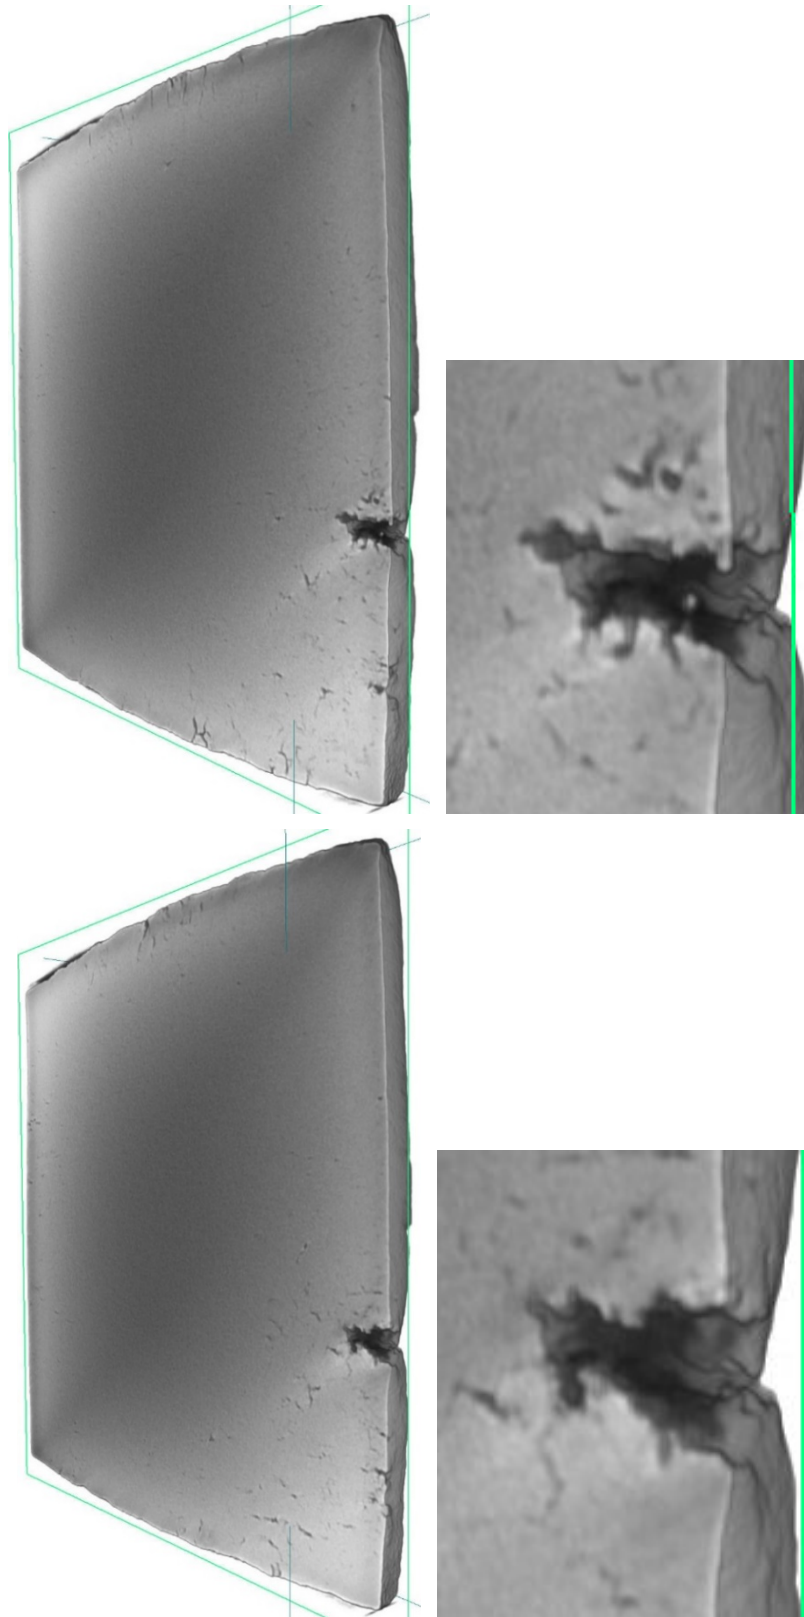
Two sectioned 3-D views more than halfway through the thickness of the block from the more severely cracked surface and close-up views of the large tear in both
